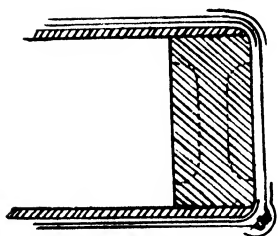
METHOD OF ATTACHING FABRIC TO REAR SPAR
